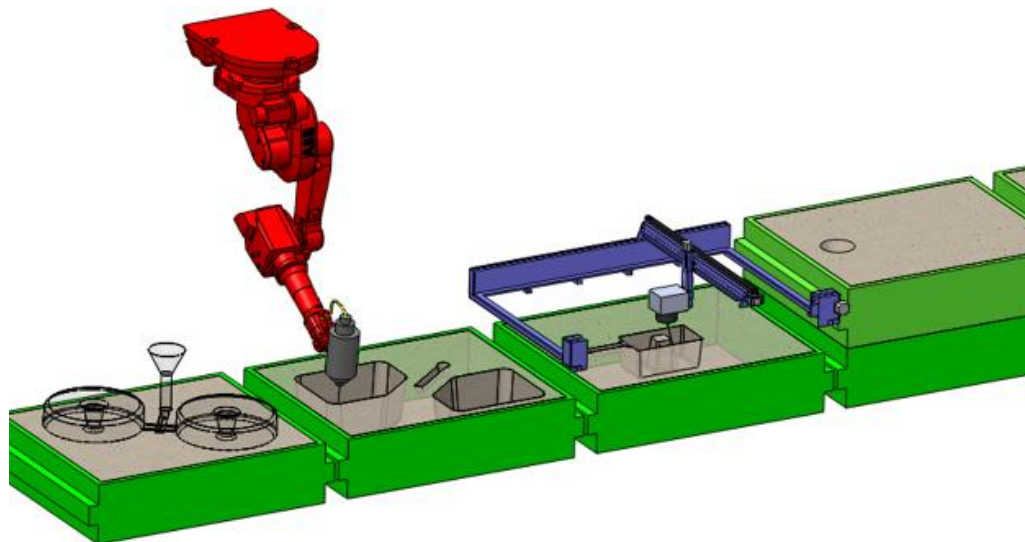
Upside down mounted ABB IRB 1600-robot arm and X-Y-Z gantry table moving fiber laser head over horizontal moulding line. These types of laser engraving applications could reach practically all required mould geometries at Componenta Högfors foundry.
